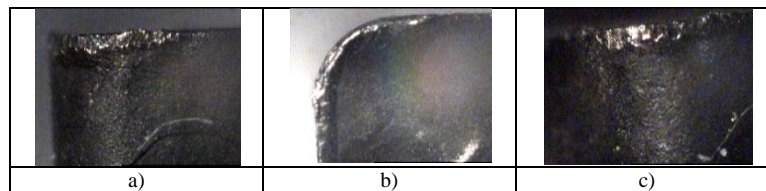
View of tool at  $V_c = 132$  m/min,  $S_o = 0.063$  mm/rev in dry condition after 27 min. of machining [a] Flank, b) Crater, c) Nose wear]
